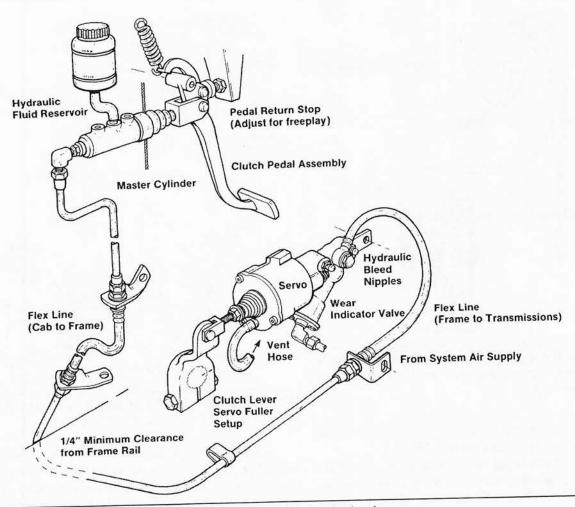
The typical components used in a hydraulic clutch circuit.
